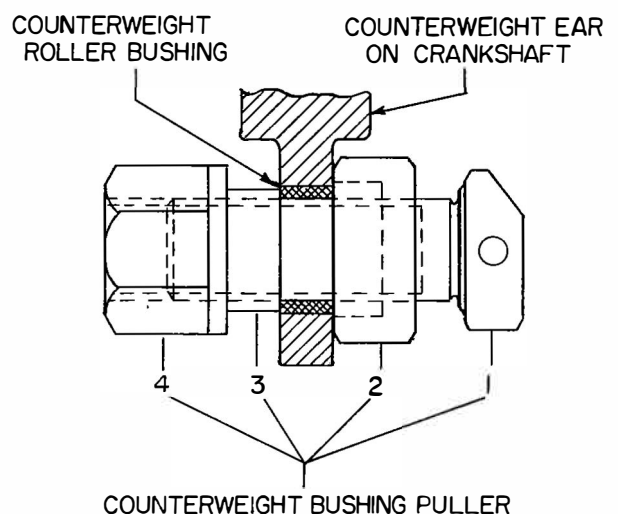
Removal of Crankshaft Counterweight Bushing
